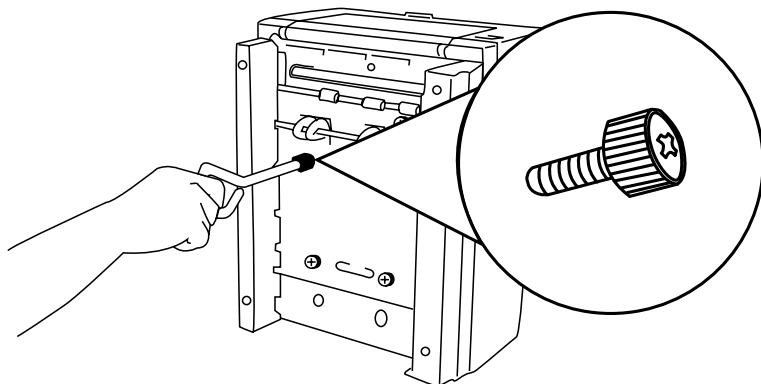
Fasten Feeder to Printer Bottom
